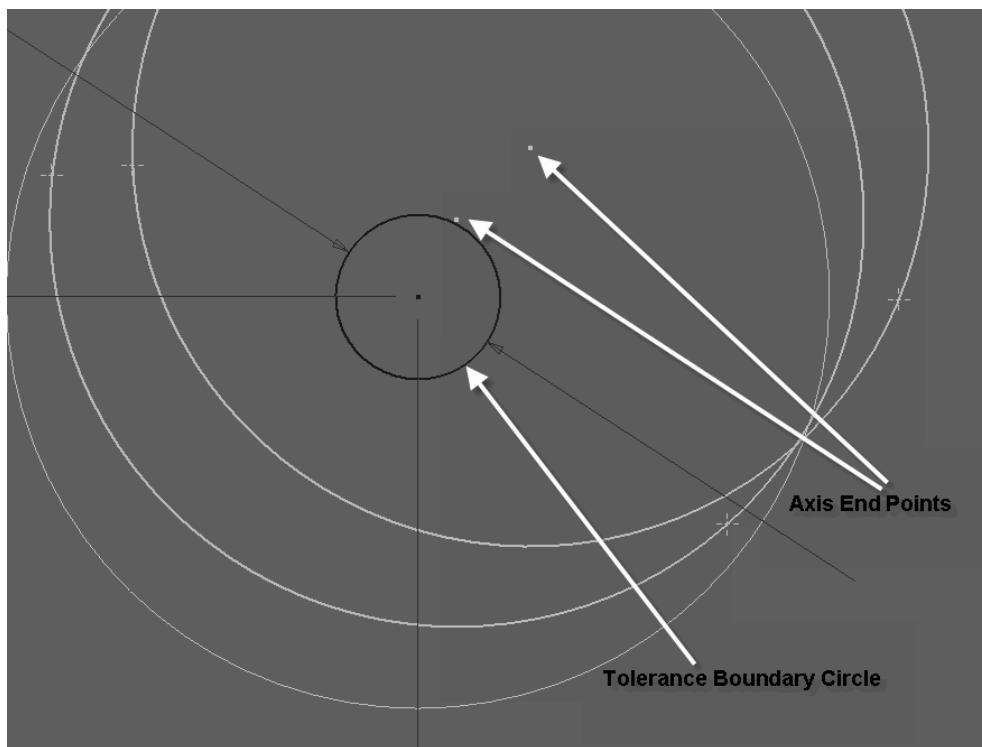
Examining the inspection points and the tolerance boundary.
